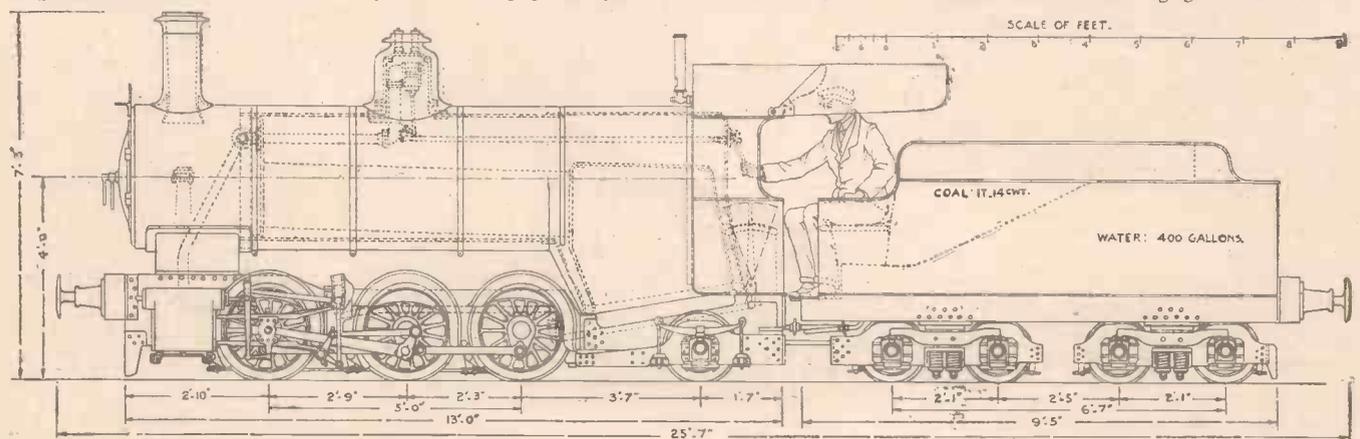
An 0-6-2 locomotive for 27in. to 30in. gauges.
